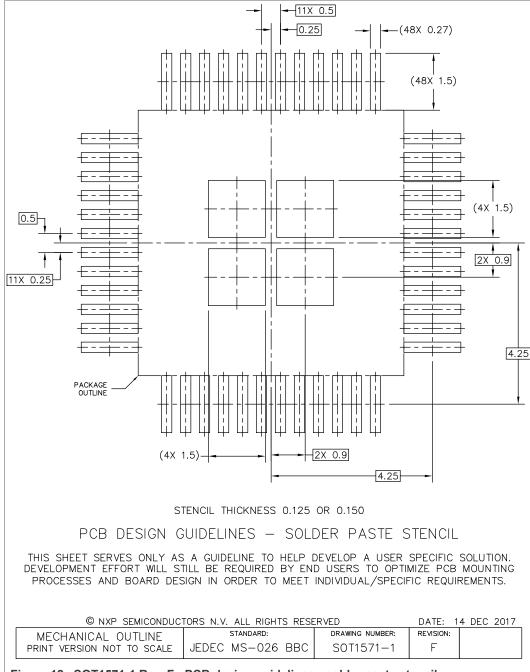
SOT1571-1 Rev. F - PCB design guidelines - solder paste stencil
